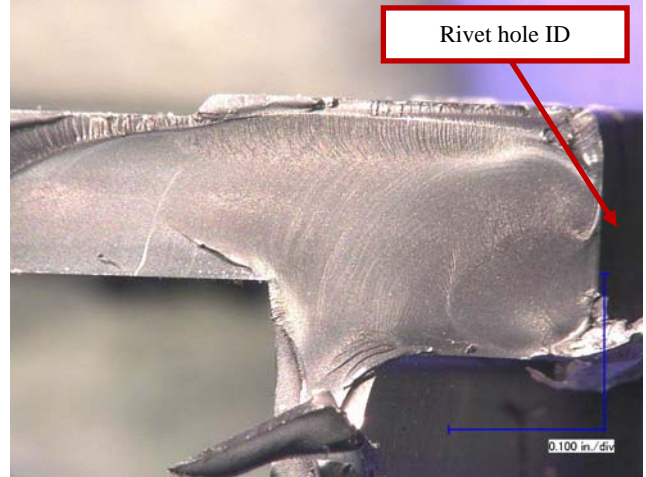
The fracture surface exhibits a relatively smooth surface texture indicative of brittle fracture. The features indicate crack initiation along the inner diameter of the rivet hole.
